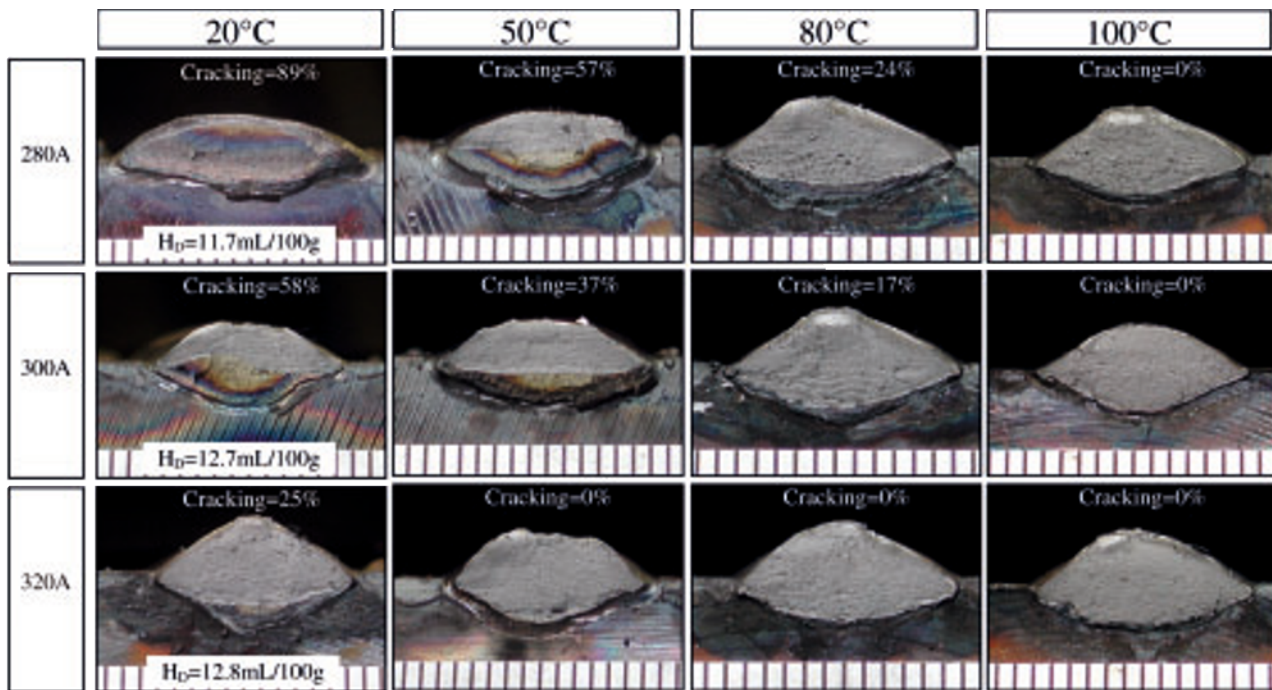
Photographs showing the G-BOP fracture surfaces with cracking percentage of H10 weld metal deposited with preheats of 20, 50, 80 and 100 °C using CO₂ shielding gas and CTWD of 15 mm
